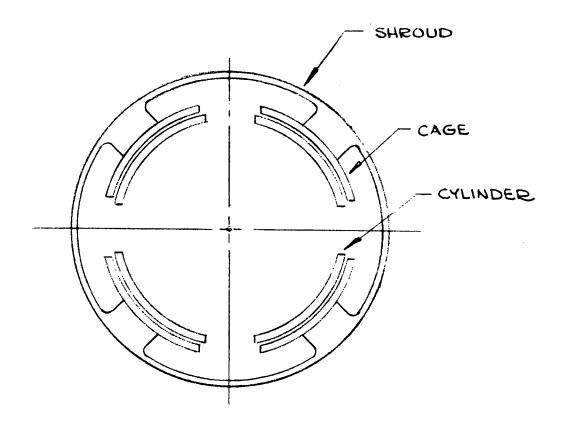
PROTOTYPE CAGE AND CYLINDER WITH SHROUD
